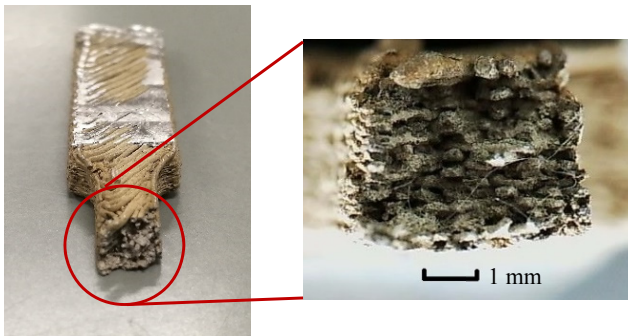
Fractured surface of the specimen fabricated using the FFF-type AM machine.
